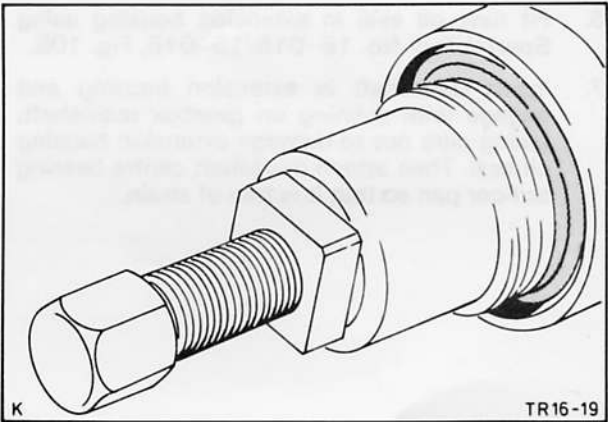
Remove extension housing oil seal with Special Tool No. 17-001
